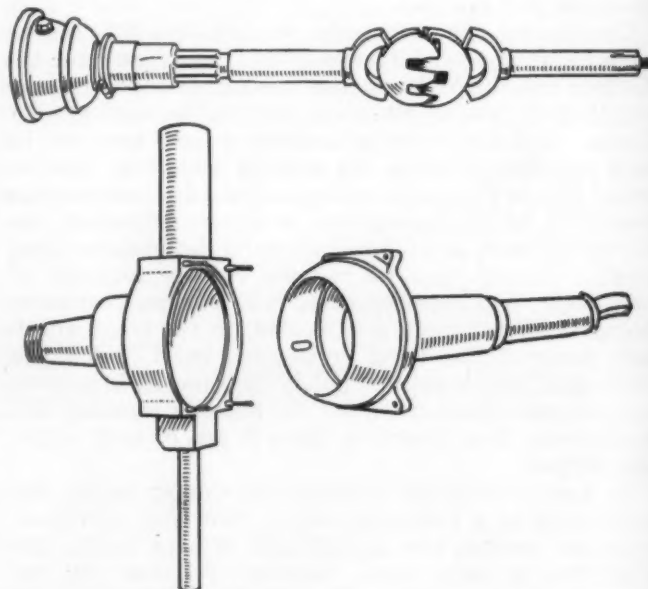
PARTS OF THE TRACTA FRONT-WHEEL DRIVE
